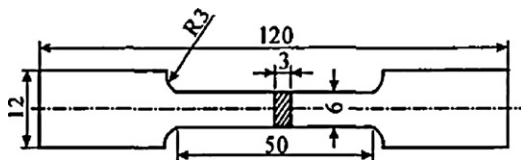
Sketch of tensile test specimen and its gauge size (mm).
